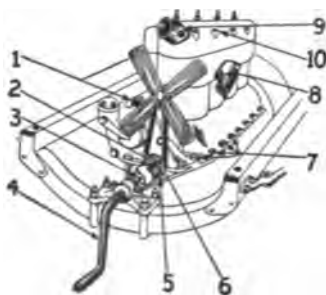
Ford engine in process of preparation for mounting Gray & Davis system
